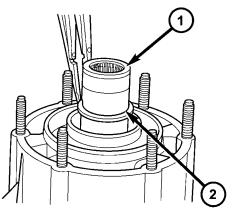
Install Input Planetary Assembly 1 - FRONT CASE 2 - INPUT PLANETARY ASSEMBLY
